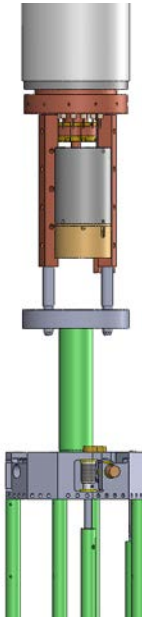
Assembly for adjusting the position of the experiment bottom flange with the gearbox.
